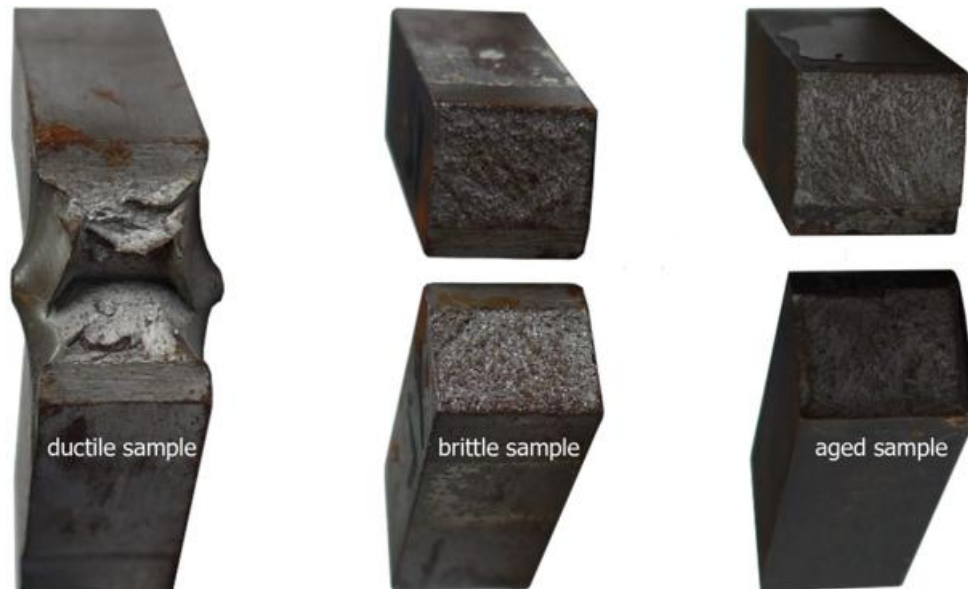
Characteristic fracture surfaces for different fracture modes after Charpy impact testing (<https://www.tec-science.com/material-science/material-testing/charpy-impact-test/>)
